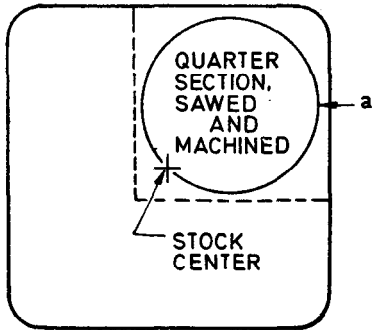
QUARTER SECTION SPECIMEN FROM SQUARE SECTION FOR MAGNETIC PARTICLE TEST, MACHINE ONLY
